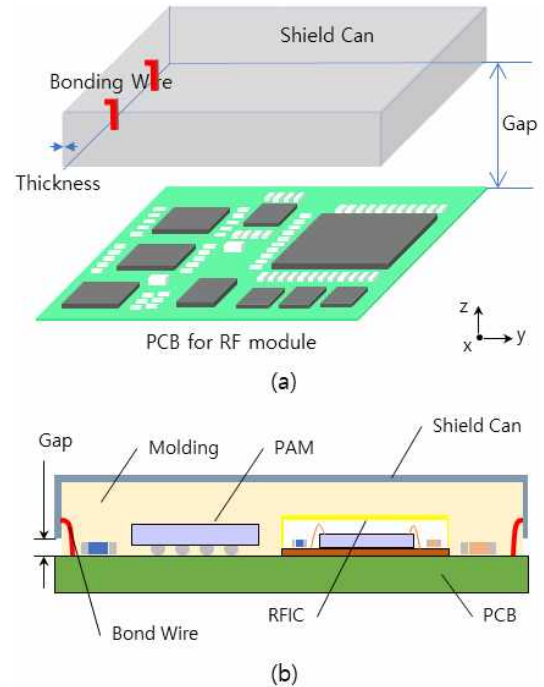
RF chipset with a shield structure. (a) 3D view, (b) side view
